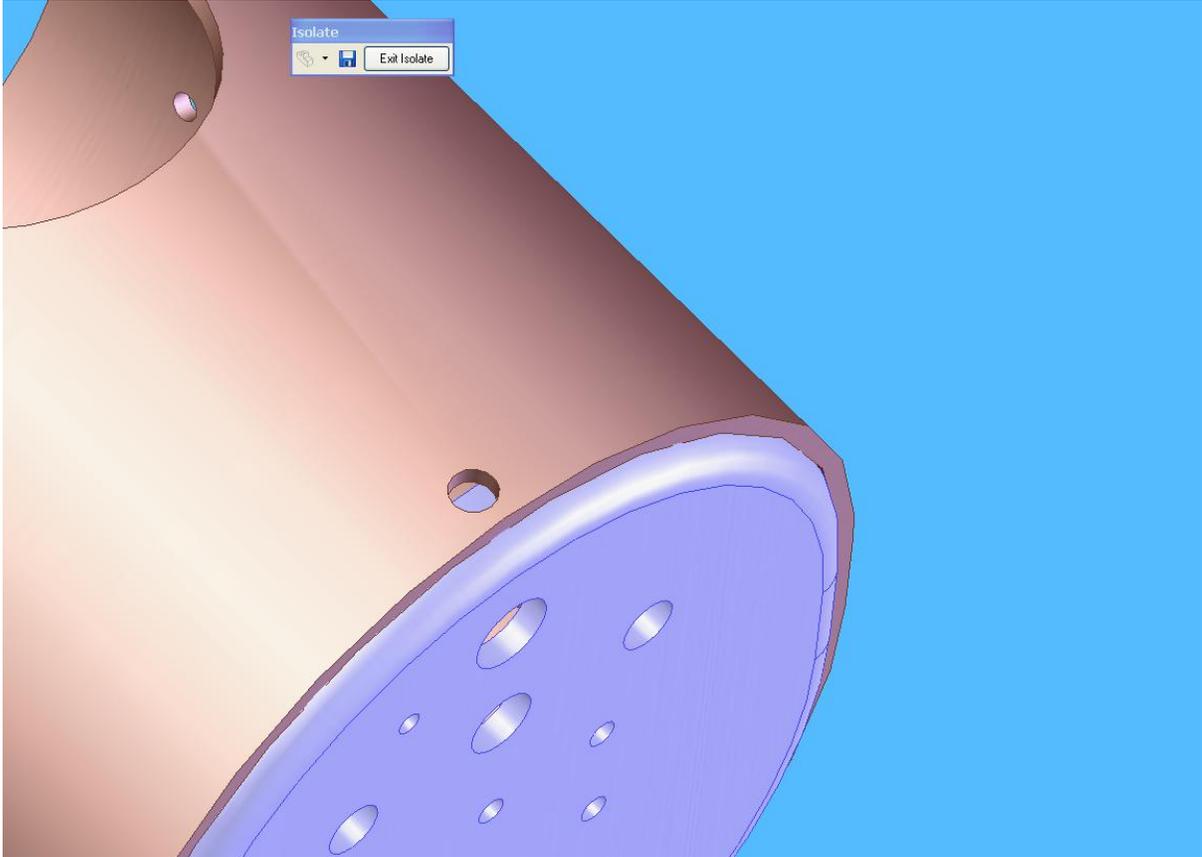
Hole for valve turret in the outer wrap of the boiler.
